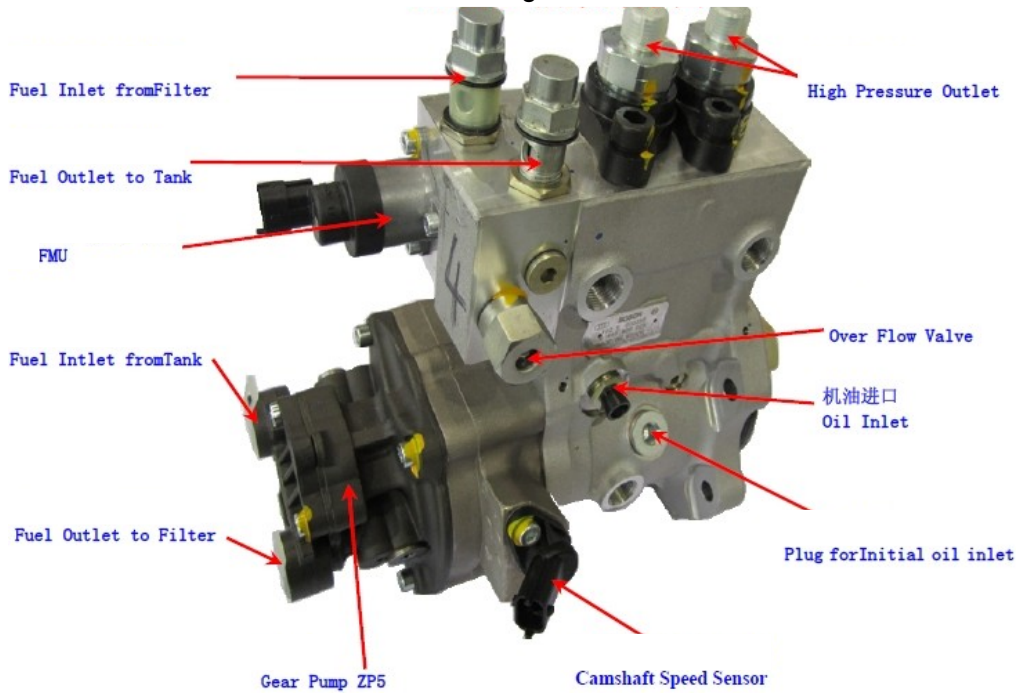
Outline structure drawing of CPN2.2 high pressure oil pump
